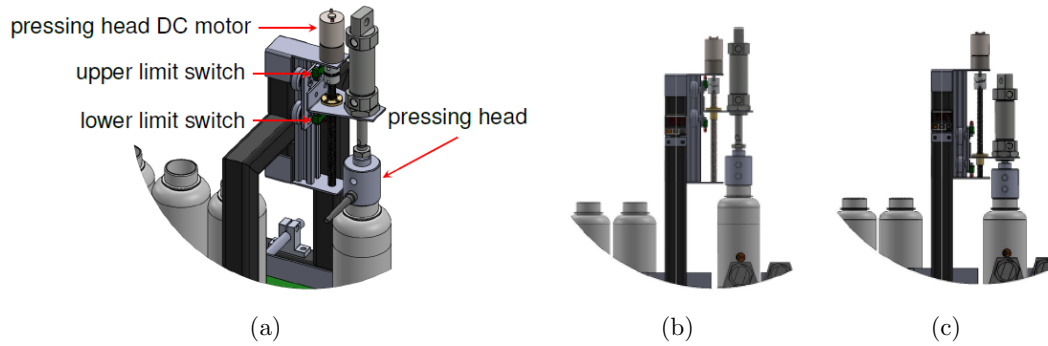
Pressing head for detecting and testing a bottle: (a) Pressing head mechanism; (b) pressing head up; (c) pressing head down
